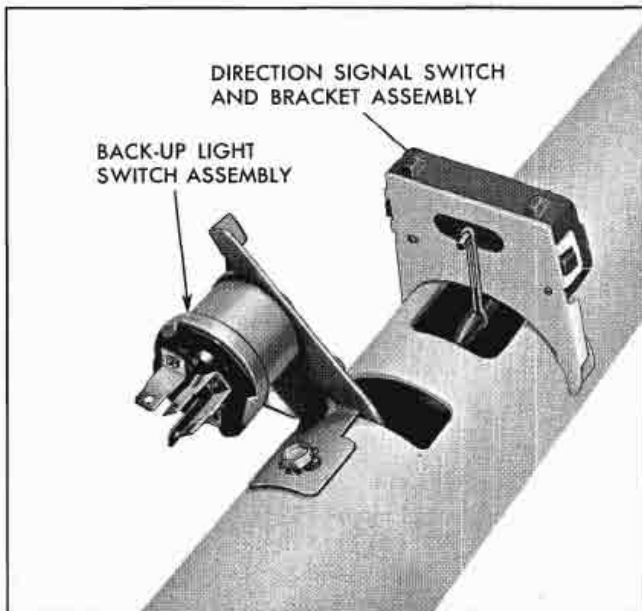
Actuator Lever Engaging Direction Signal Switch
